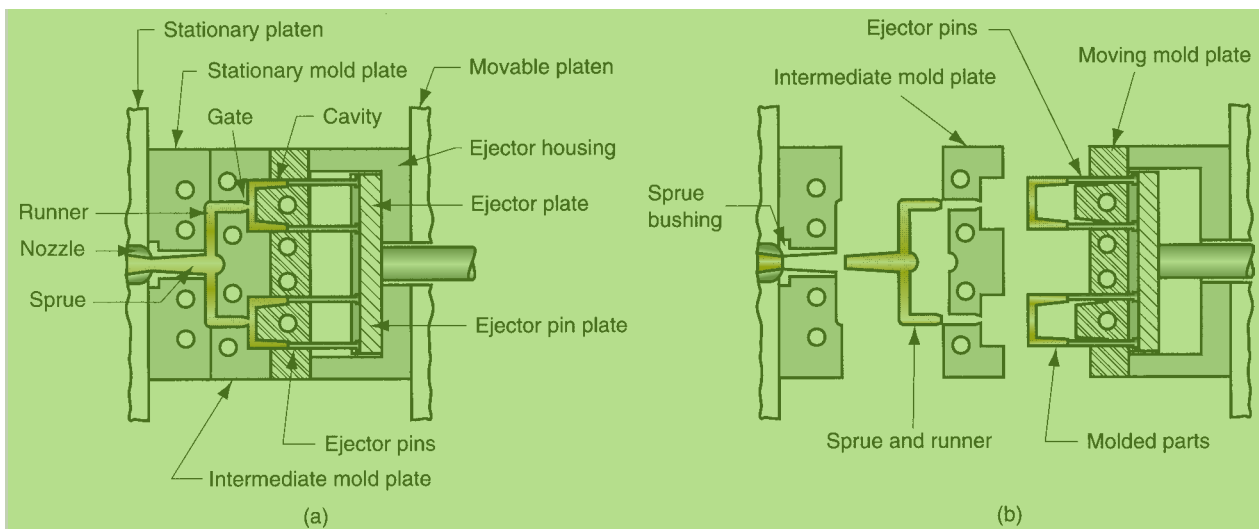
Three-plate mold: (a) closed, and (b) open.
